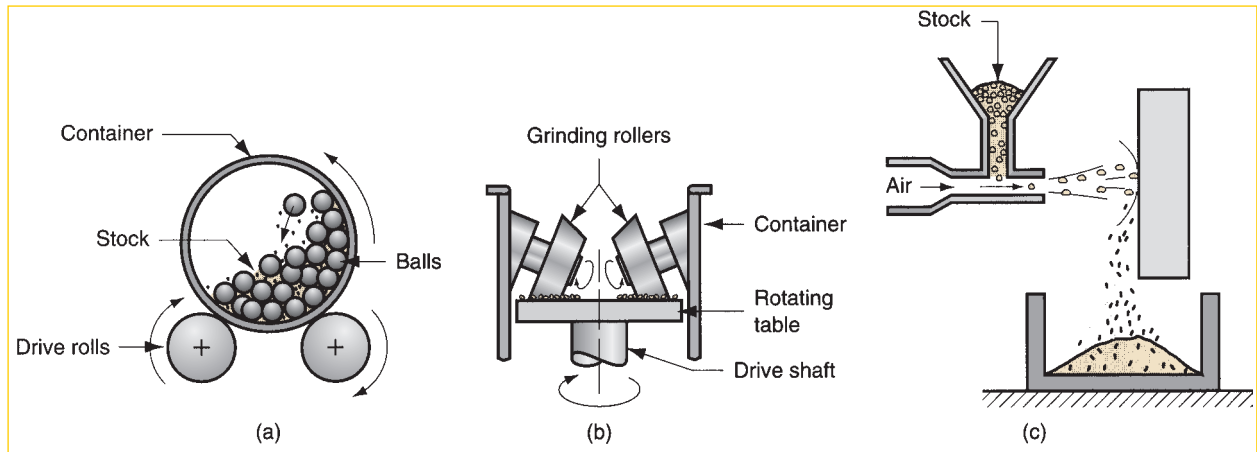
Mechanical methods of producing ceramic powders: (a) ball mill, (b) roller mill, and (c) impact grinding.
